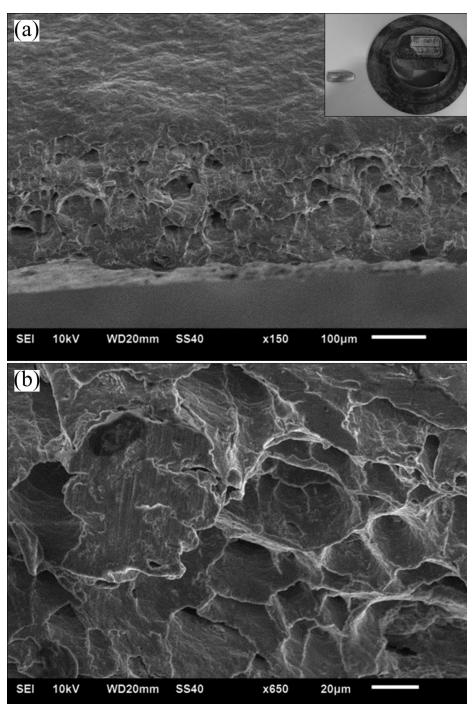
Fracture surface of sample cut from cup corner
